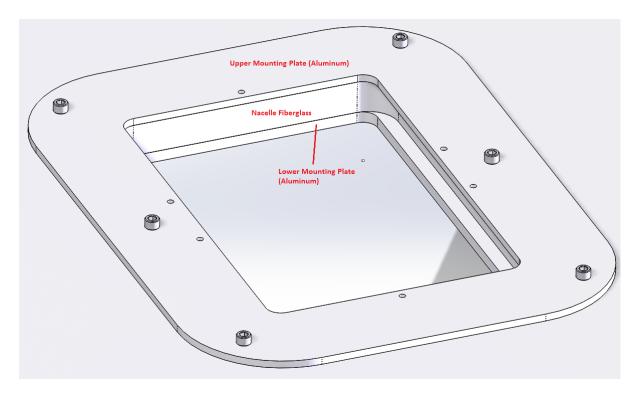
Lower Deterrent Mounting Hardware without Deterrent
